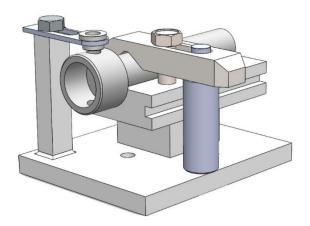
3D model of proposed shaft drilling jigs and fixtures.
